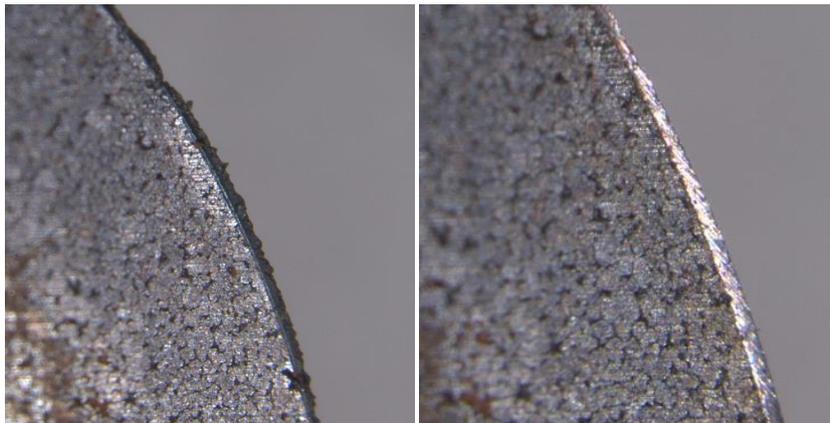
SMC edge. Edge still on. Figure 32: SMC edge. Edge removed.
